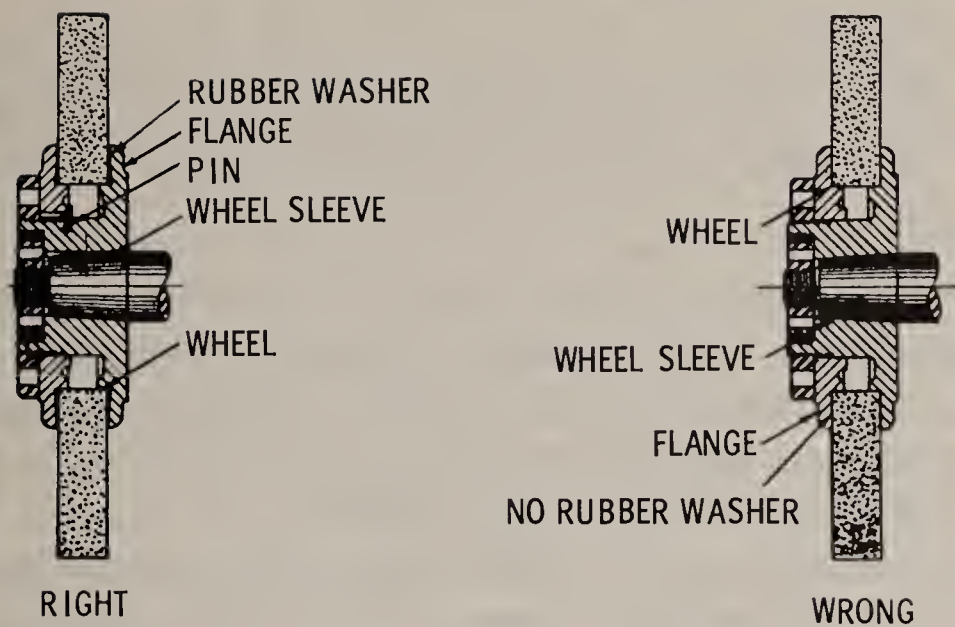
Method of grinding-wheel installation. Great care should be observed when mounting grinding wheels to see that flanges of the same diameter as the spindle are properly placed. The hole in the outer flange should be an easy sliding fit on the spindle or arbor. All flanges should be recessed at the center to a depth of at least one-sixteenth of an inch in order that they may bear at the outer edges only. The nuts should be tightened only enough to hold the wheel firmly, because excessive tightening may damage the wheel.
